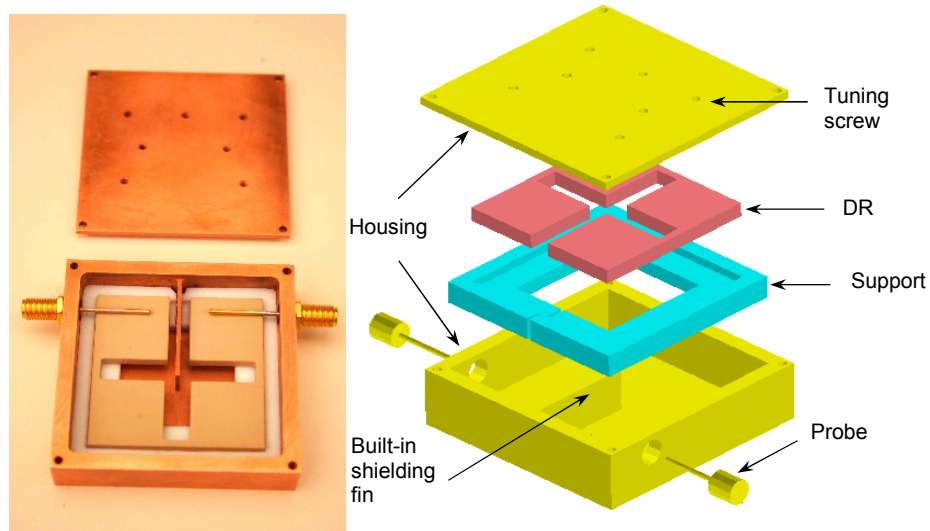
Photograph and the assembly of the fabricated 4-pole DR filter.
